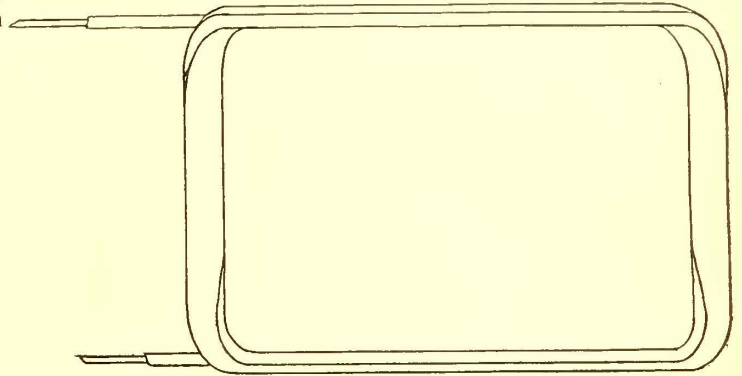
SHAPE OF THE FIRST FORMED COILS
